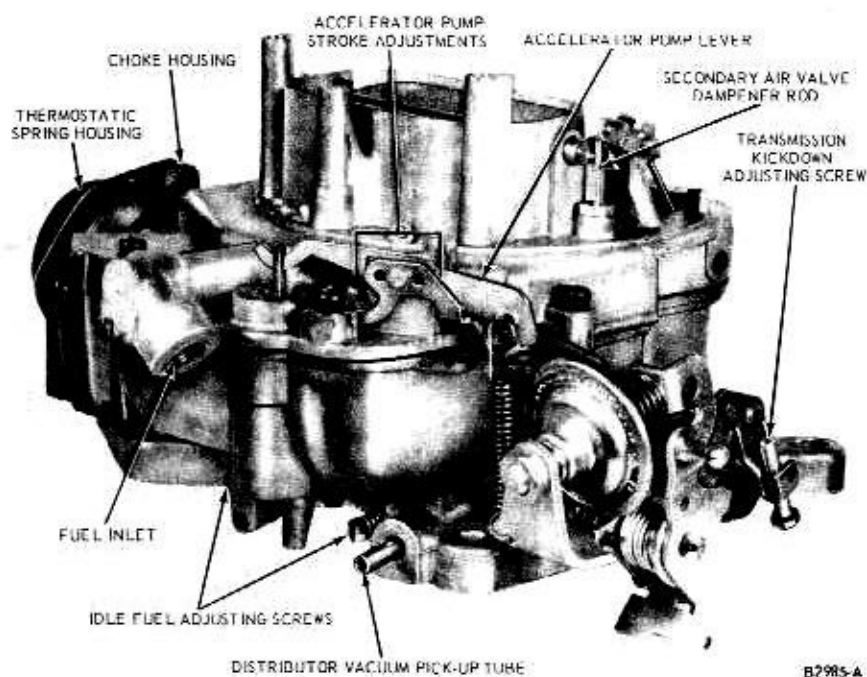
Autolite Model 4300 4-V Carburetor—Left Front 3/4 View
